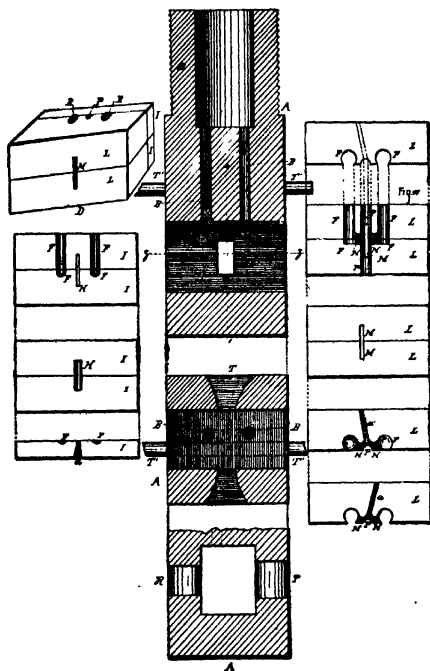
The Hyatt and Burroughs Apparatus for Coating Bars or Springs with Celluloid.
